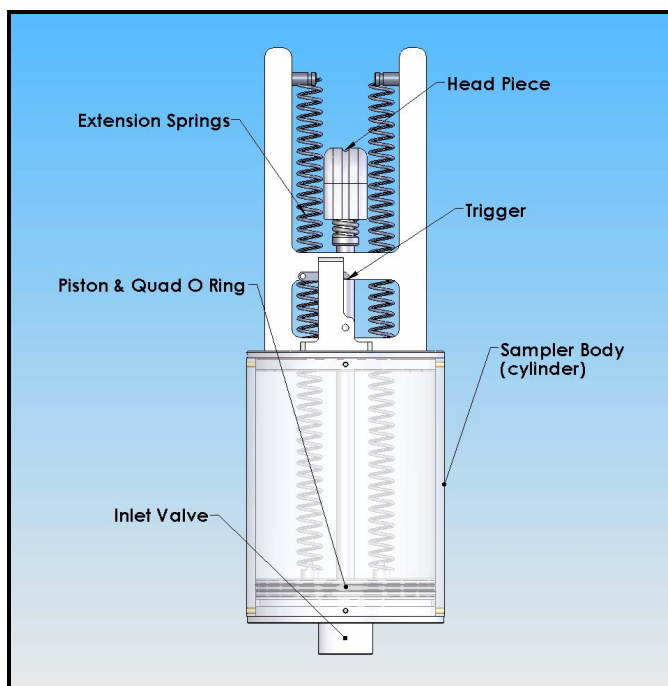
Rev 1.1 of Gulper sampler. Extension springs are mounted on interior of the sampler. The trigger cable passes over the head piece engaging the trigger. The sampler is closed, in armed position.
